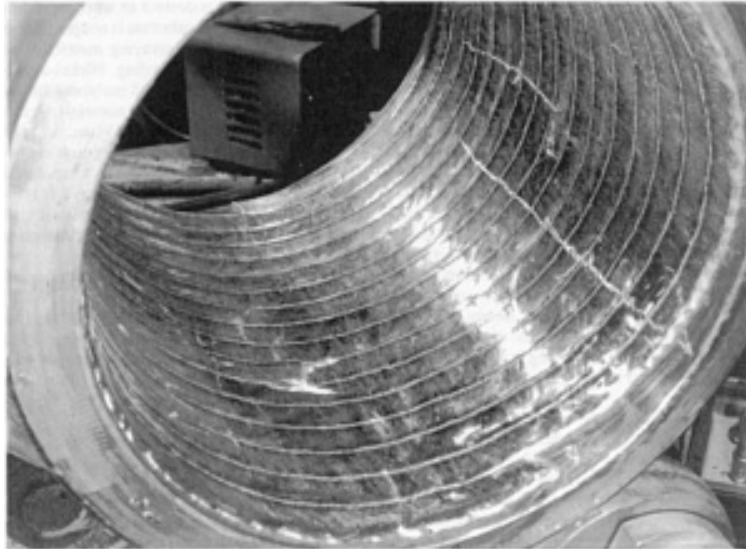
(B) CLOSEUP VIEW OF THE 25 MM (1 IN.) WIDE BY 0.64 MM (0.025 IN.) THICK STAINLESS STEEL STRIP USED TO CLAD A 300 MM (12 IN.) INNER DIAMETER PRESSURE VESSEL NOZZLE. COURTESY OF J.J. BARGER, ABB COMBUSTION ENGINEERING
